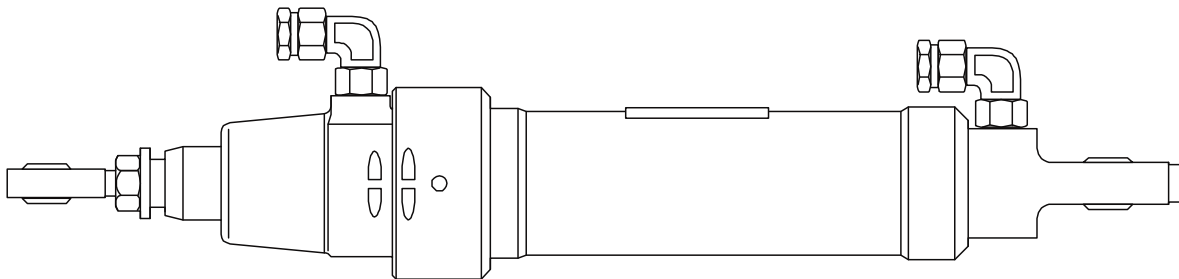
Landing Gear Hydraulic Actuator Assembly
